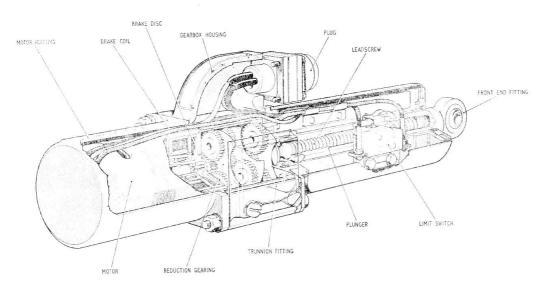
Cutaway view of actuator, Type ICZ 135261
